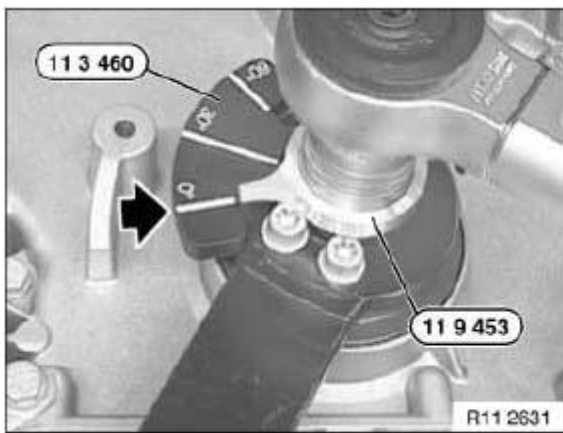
Identifying Special Tool With Clamping Screw On Socket
